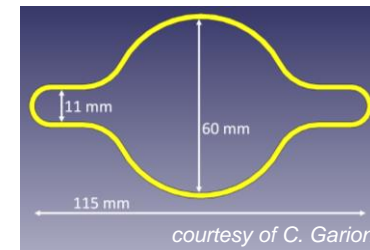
Cross section of beam pipe with winglets. *courtesy of C. Garion
